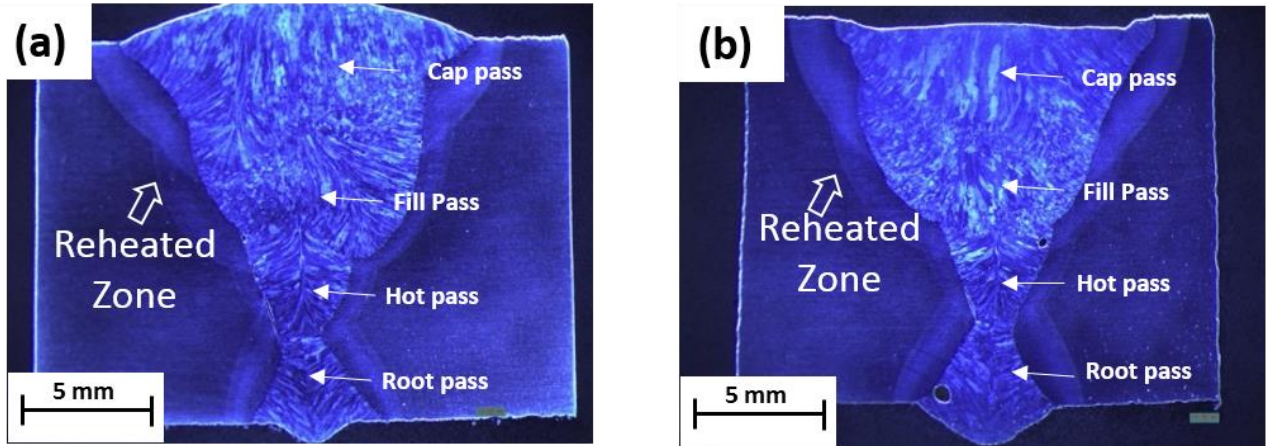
Macrograph of a) weld A and b) weld B produced by wire A and wire B respectively (2% Nital etchant)
